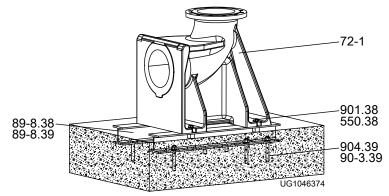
Fastening the base elbow with foundation rails and chemical anchors
